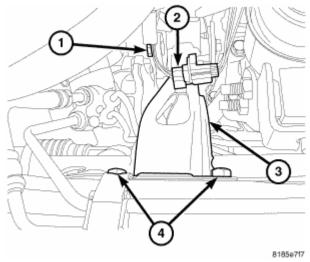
REAR MOUNT-ATX Courtesy of CHRYSLER LLC
